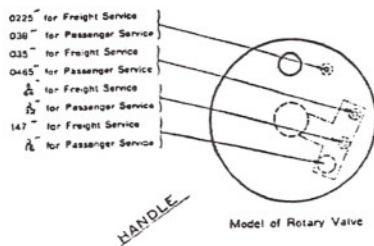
Rotary Valve and the Rotary Valve Seat of the Single Car Testing Device
